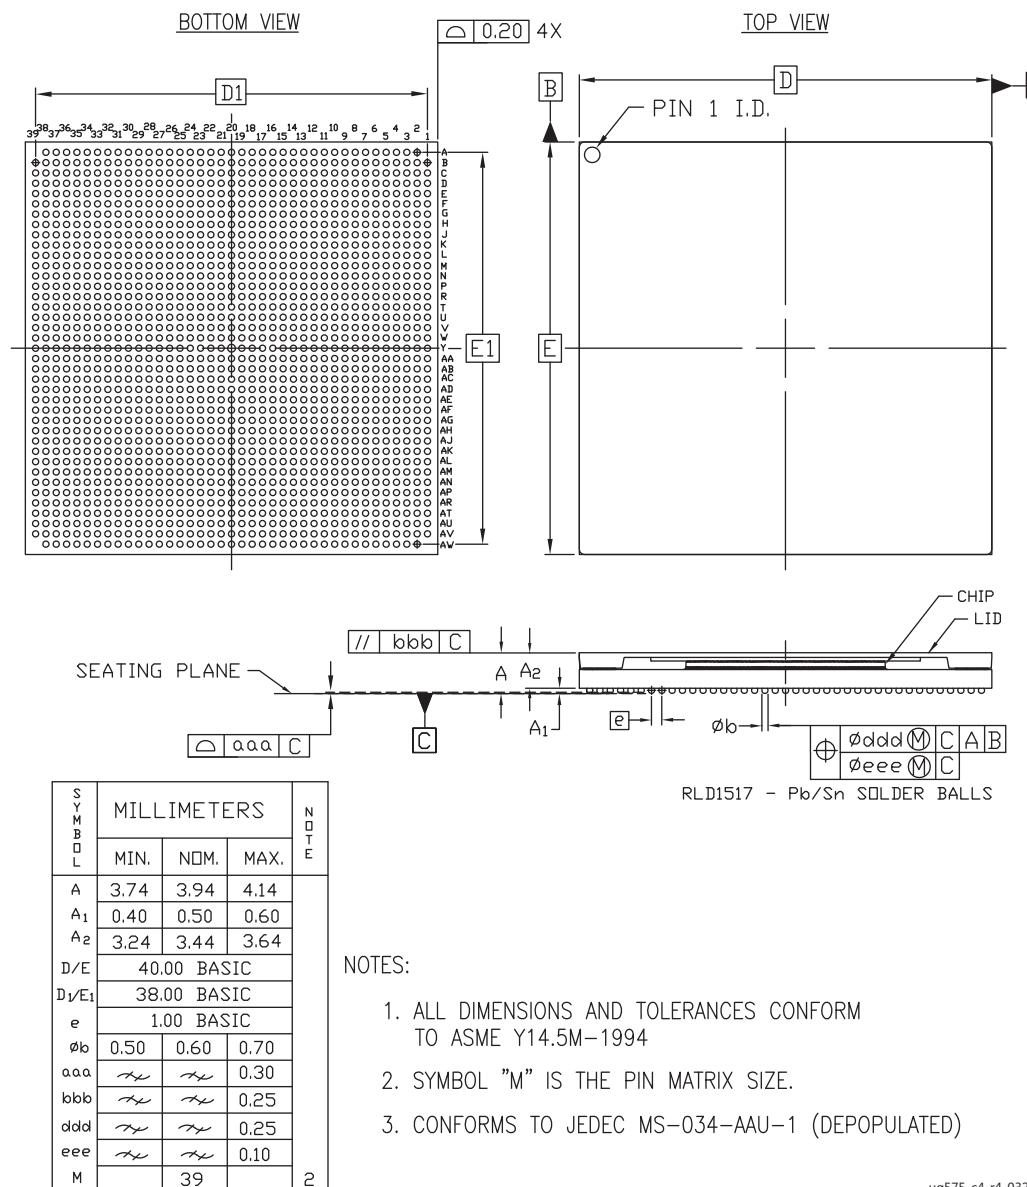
Package Dimensions for RLD1517 (XQKU115)
